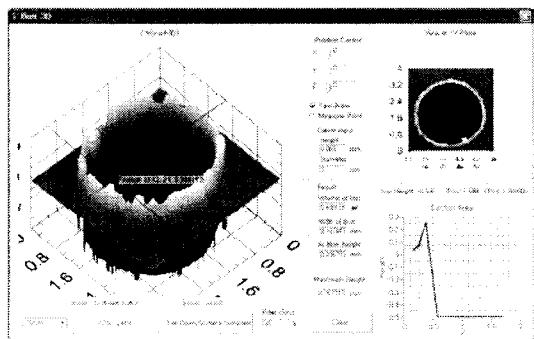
Measurement of Burr in Drilling ø 3 Hole
